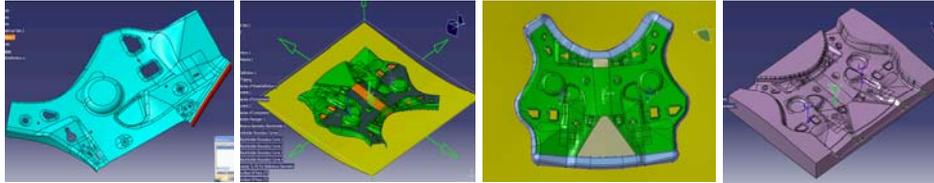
A sample for an integrated die design system; DIEMAKER for CATIA V5; Typical workflow from part over blankholder design to addendum surfaces and finally solid model export.
